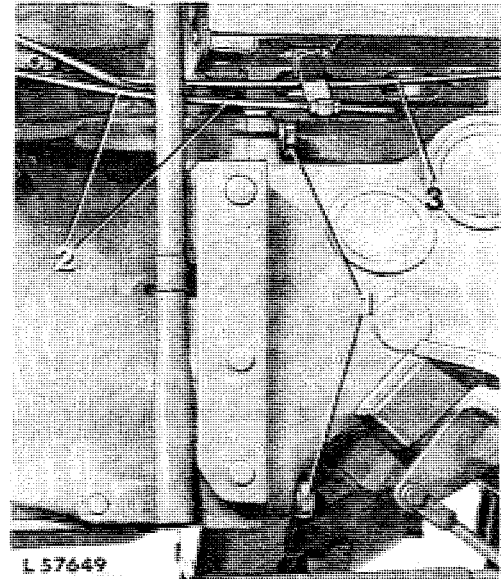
Separating between Engine and Clutch Housing, L.H. side
